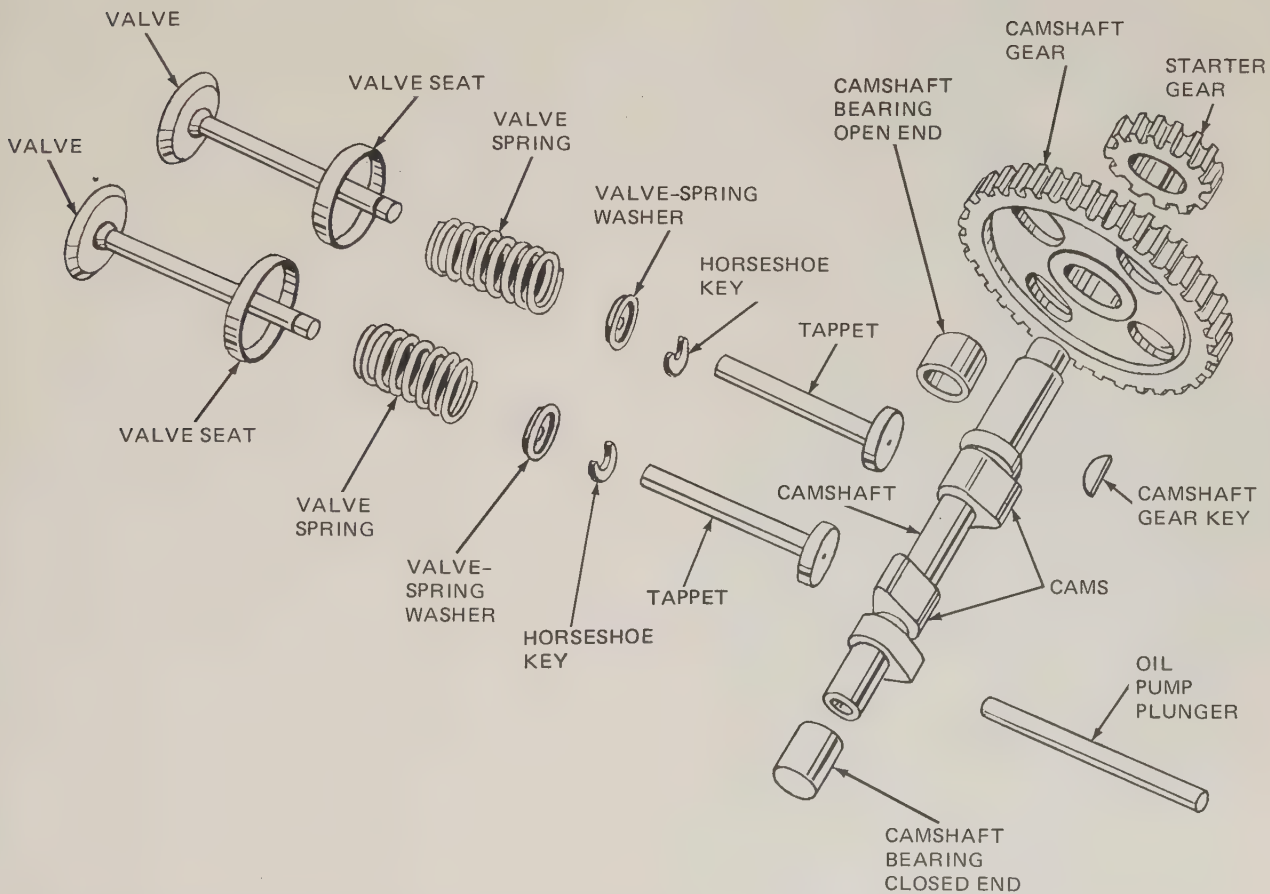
Complete valve train for a one-cylinder L-head engine. (Cushman Motors Division of Outboard Marine Corporation)
